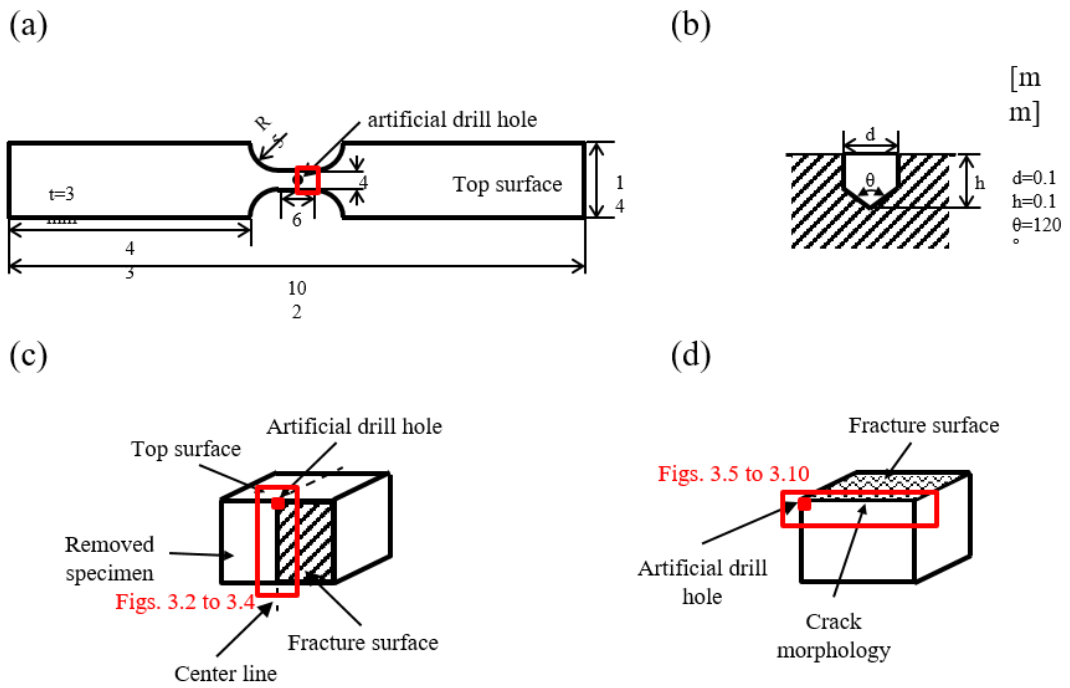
(a) Specimen geometry used for the bending fatigue test. (b) Magnified schematic of the shape of the drill hole. (c) A schematic of fractured specimen cut by saw machine for fracture surface observation. (d) Mechanically polished specimen geometry until the center line for the observation of crack morphology and corresponding microstructure.
